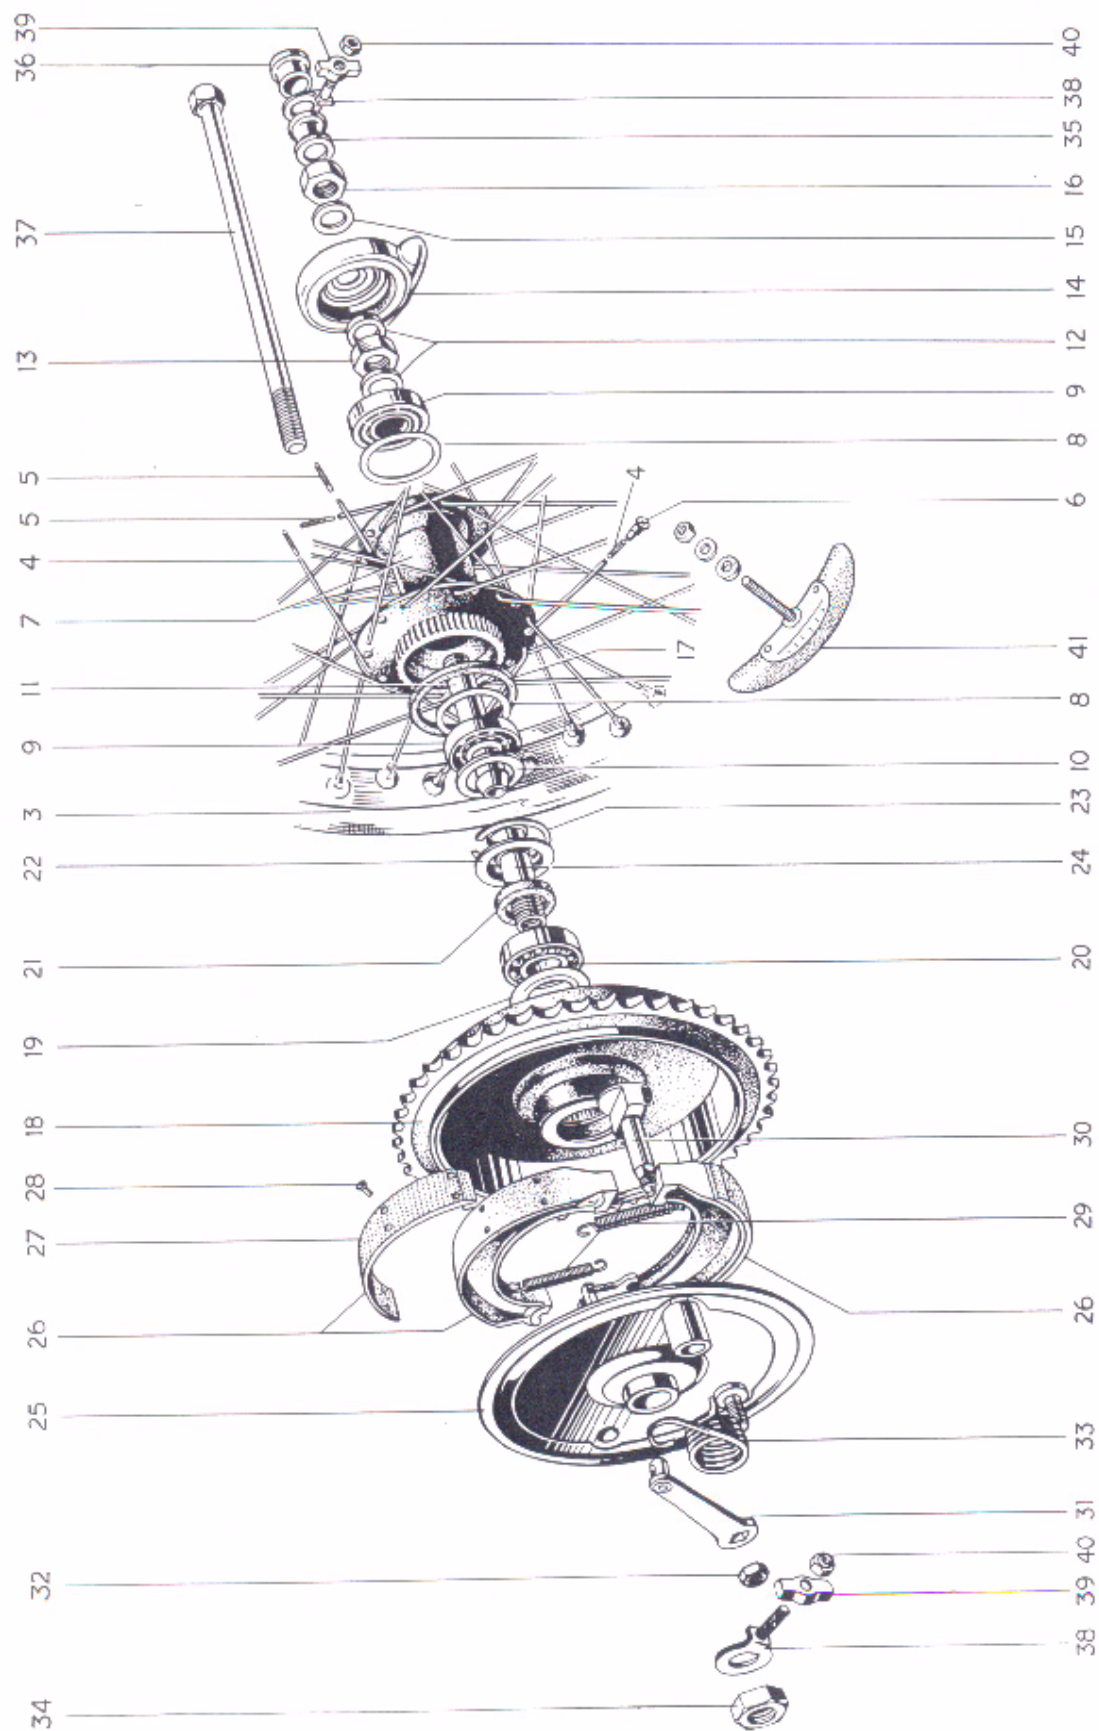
QUICKLY DETACHABLE REAR WHEEL
